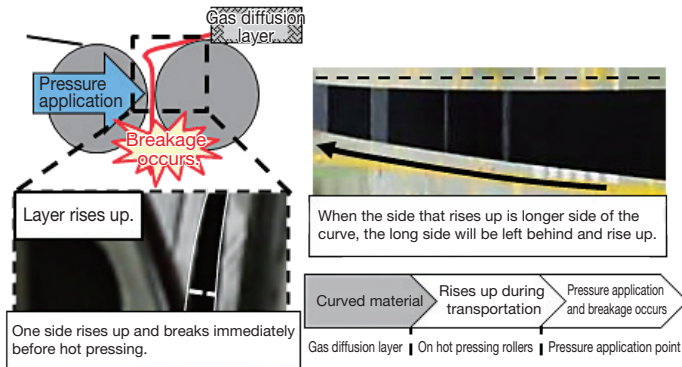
Gas Diffusion Layer Breakage Mechanism
